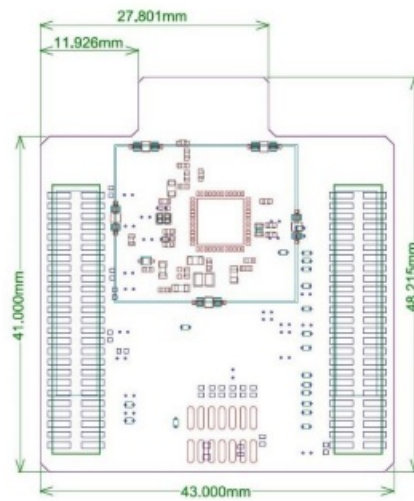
NUCLEO-WBA55CG PCB details of the MCU RF board (MB1803)
